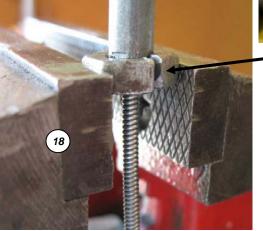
A 5/16" nut is about the right size. Cut it in half to get a nice uniform crimp of the metal housing.
